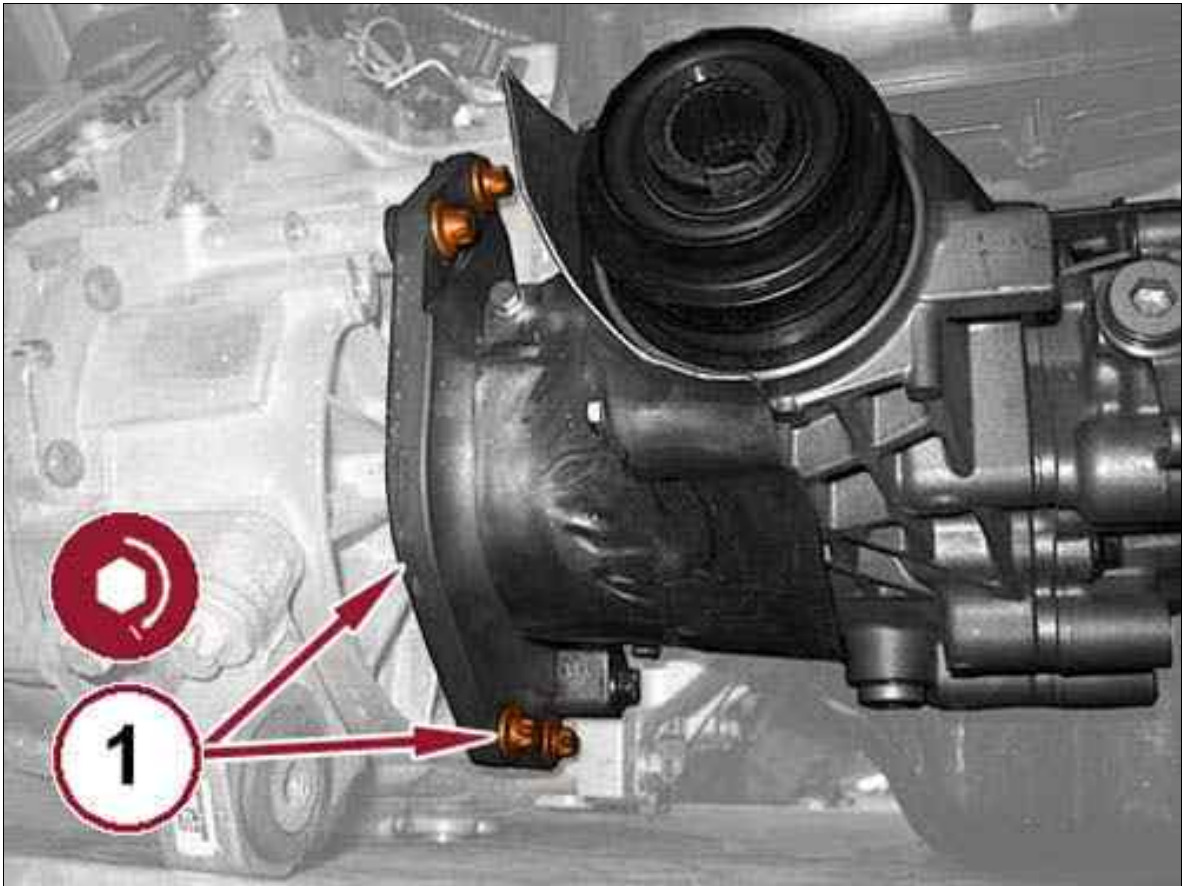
Exhaust Pipe Support Bracket Bolt & Intake Side Oil Pan To Transmission Bolts
